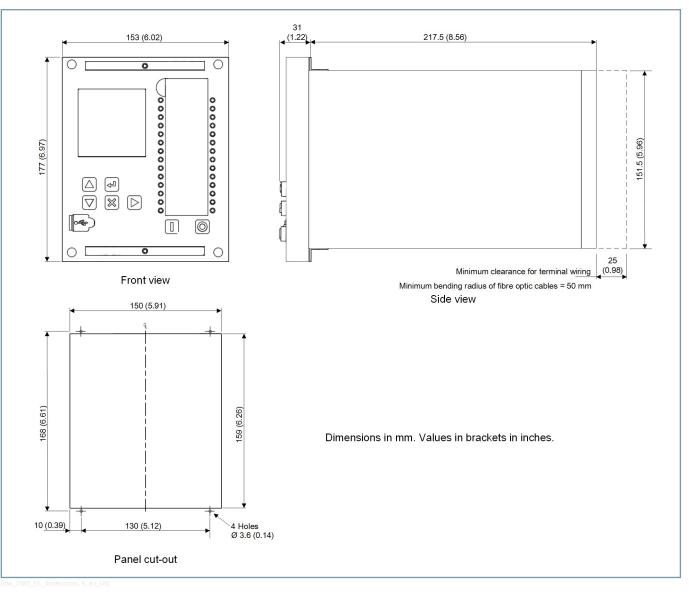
/1 Size 6 Case: Dimensions and Panel Drilling Details
